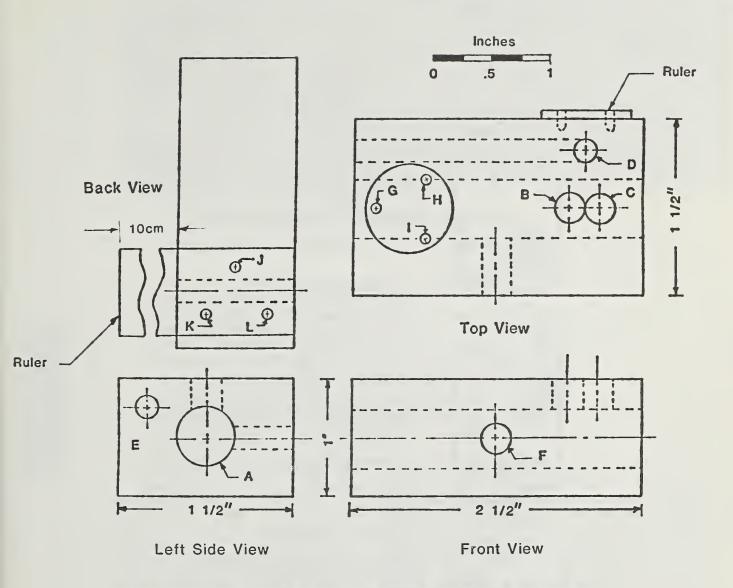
Design and construction diagram of the aluminum instrument block, illustrating the various locations for drilling, tapping, or attachment.
